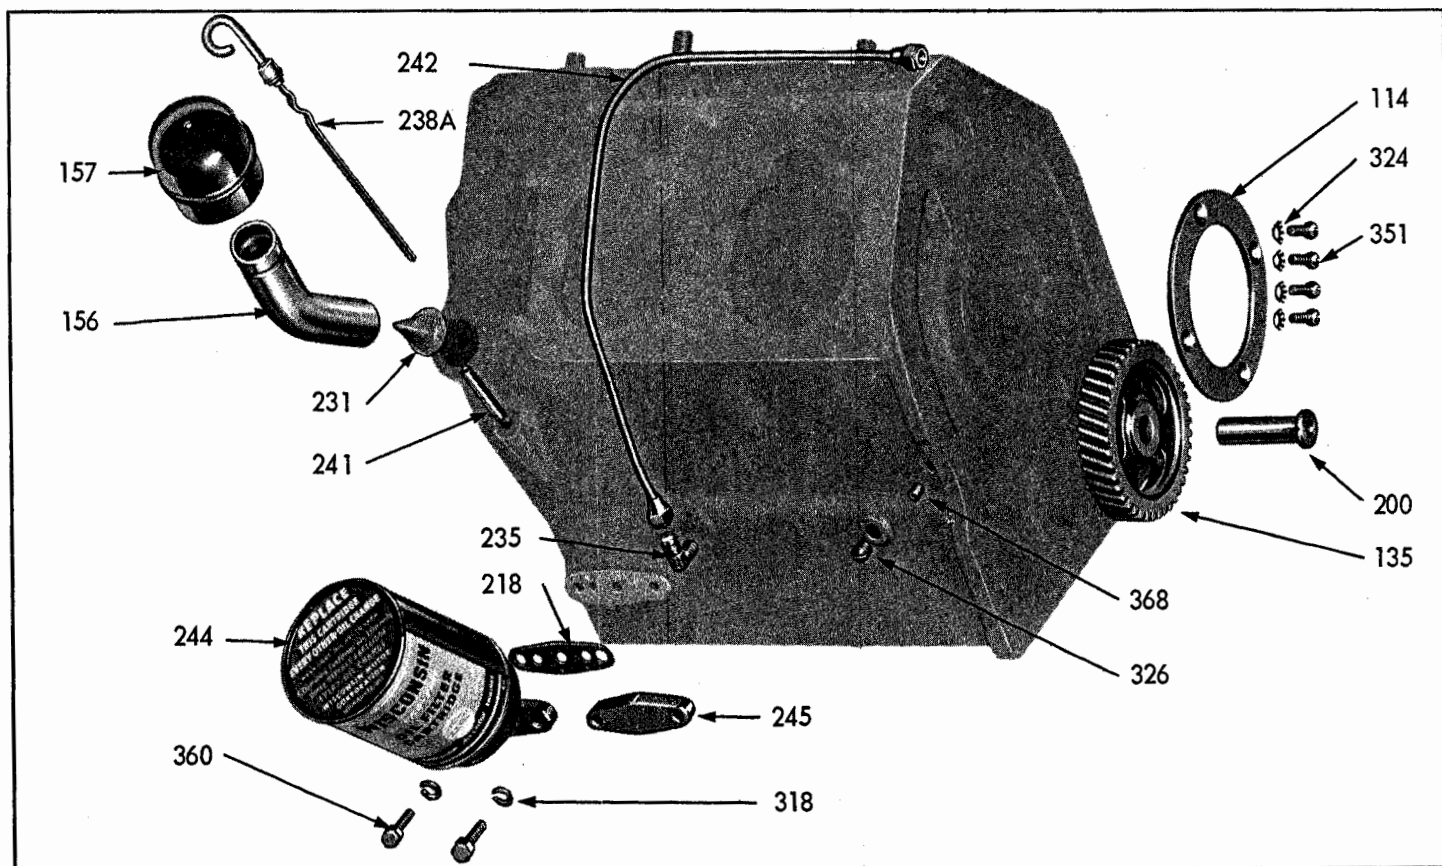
, OIL FILTER AND OIL FILLER MOUNTING GROUP
